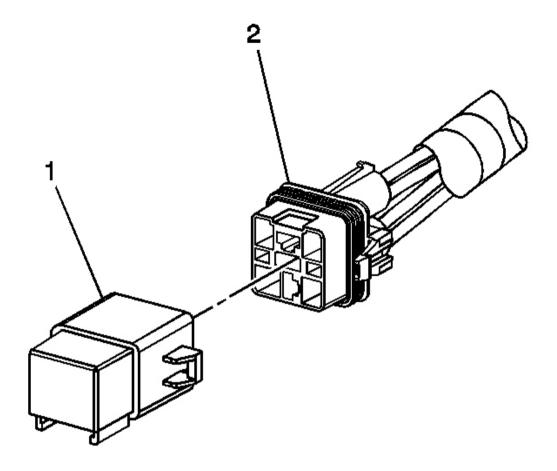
Identifying Relay & Wire Harness Connector Courtesy of GENERAL MOTORS CORP.
